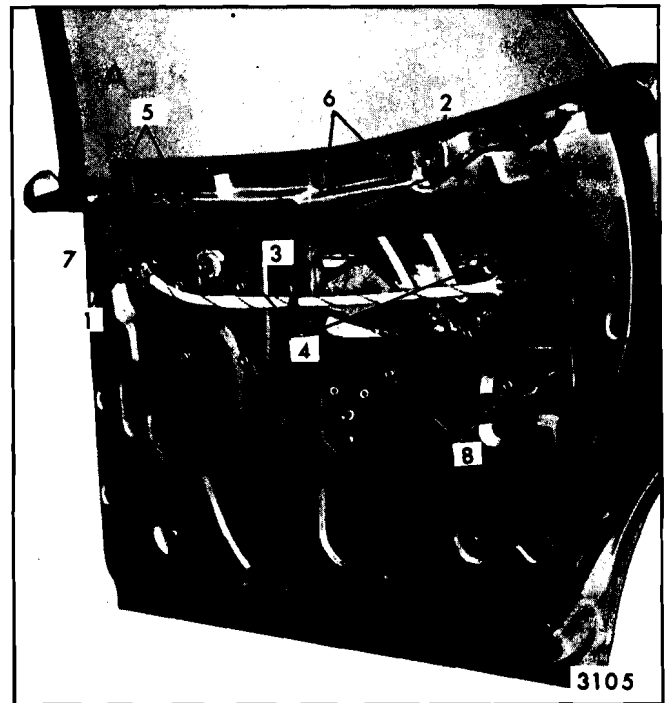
Rear Door Window Removal and Adjustments - "A-39" Styles
